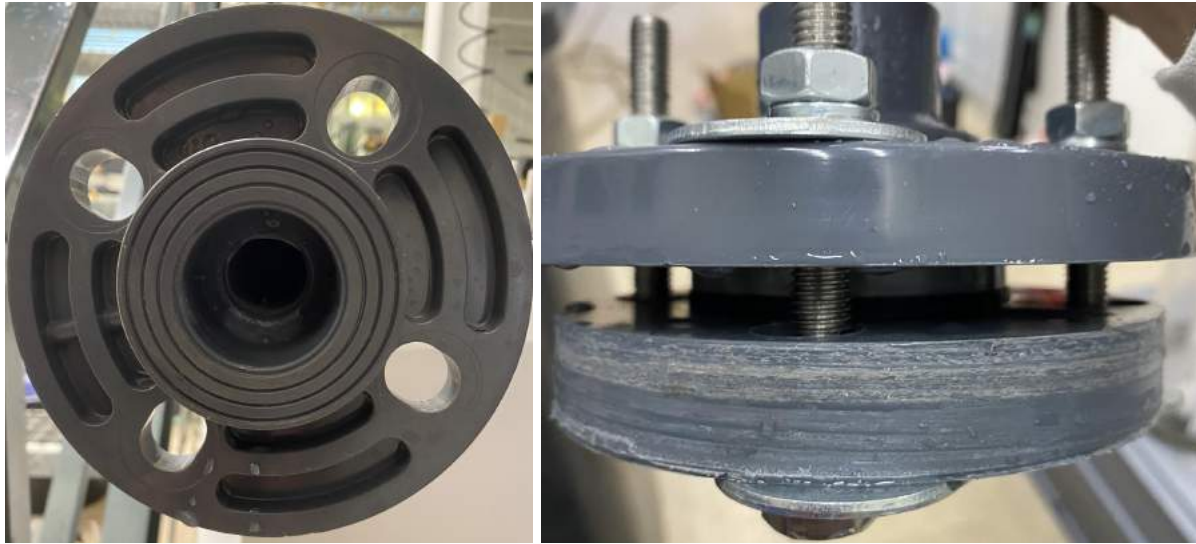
and .7: bottom view of flange in .7 and side view of the flange connection in .8
